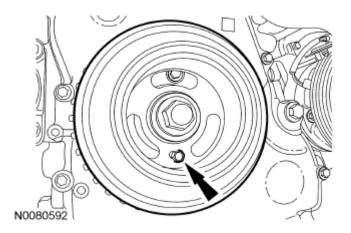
Locating Crankshaft Pulley Hole Bolt (6 mm x 18 mm)
